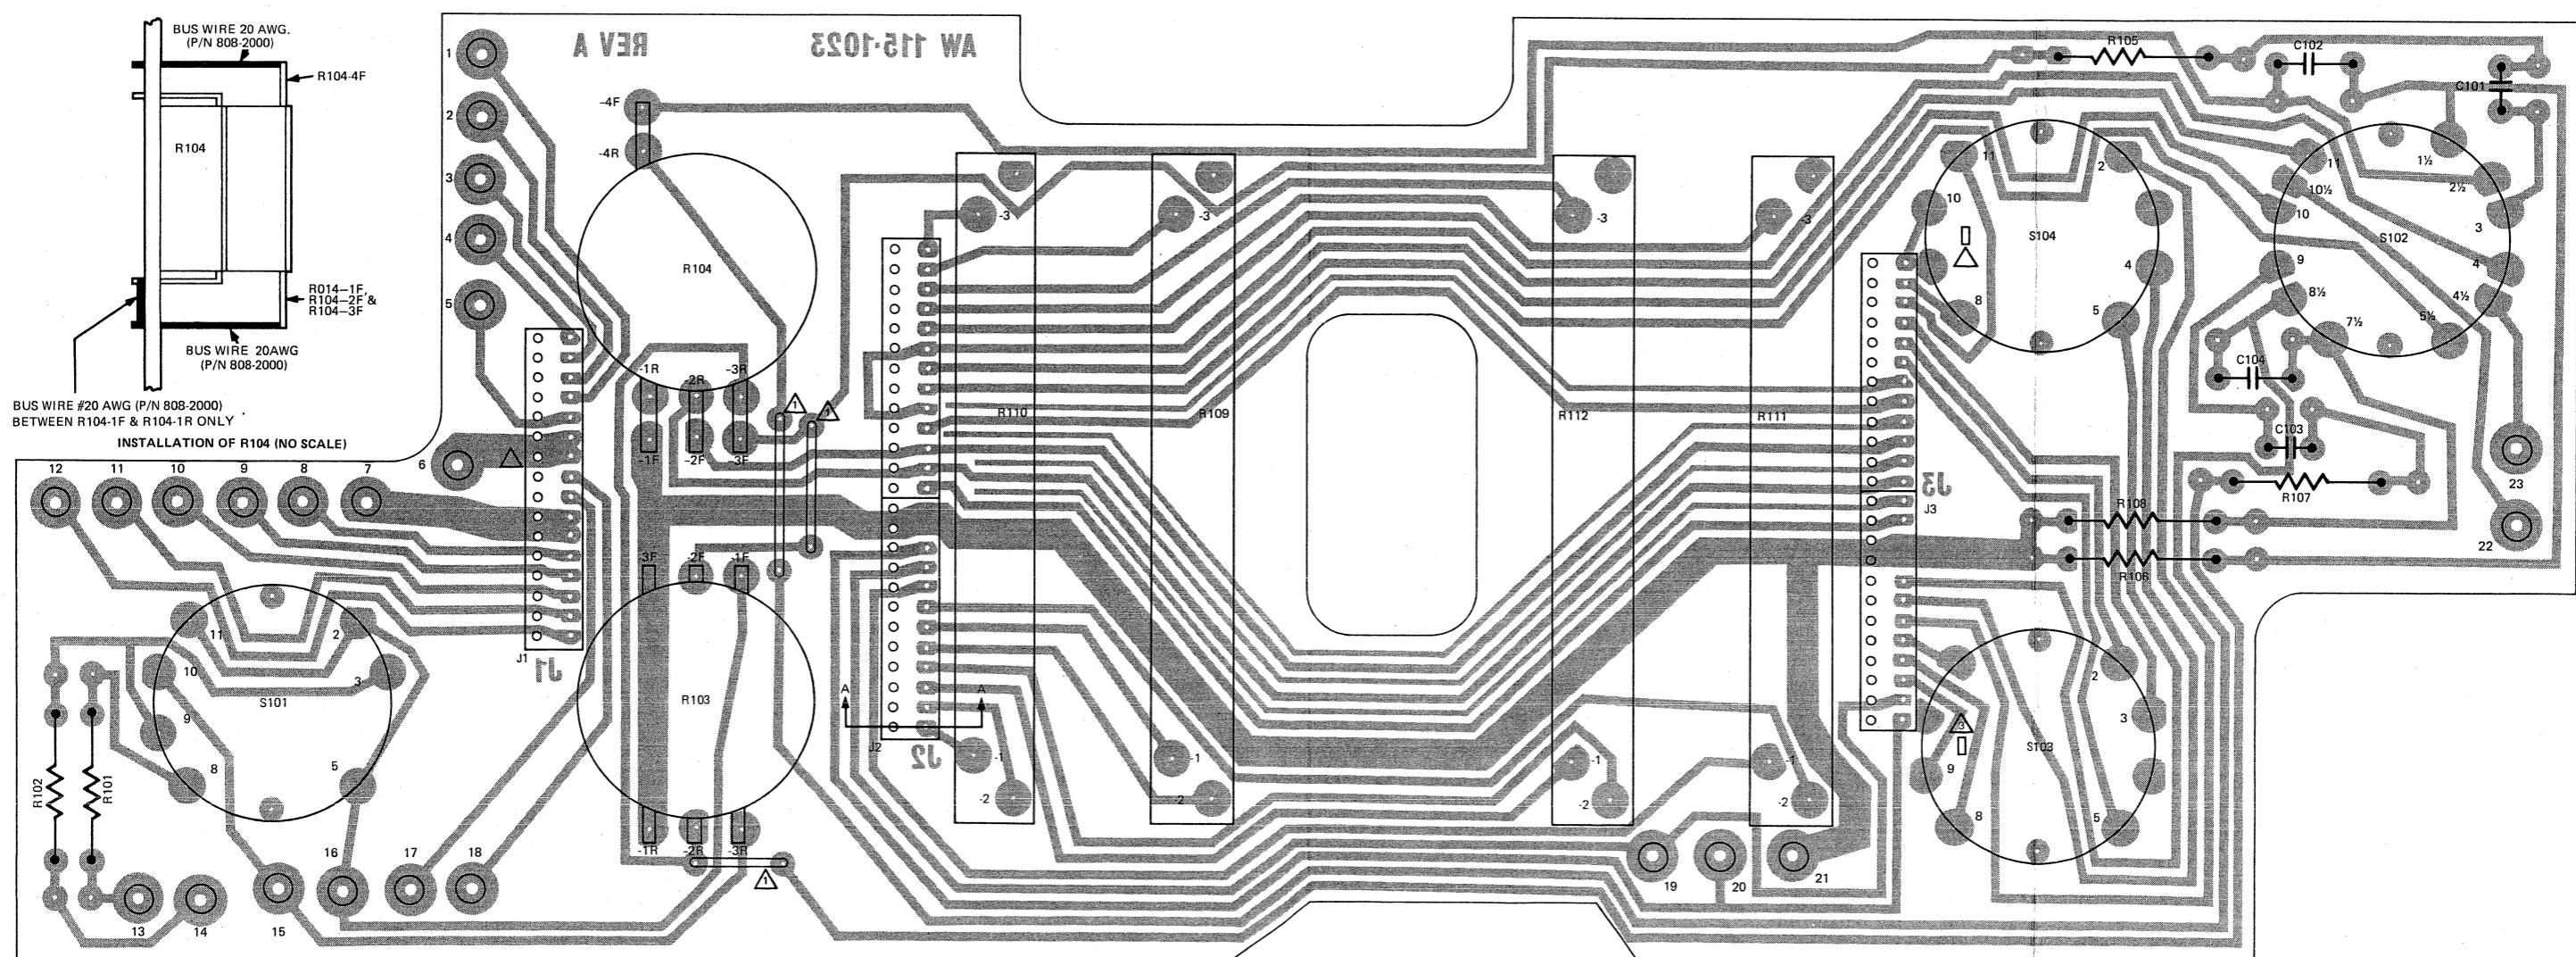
Interconnect Board – A1 Component Assembly Diagram
